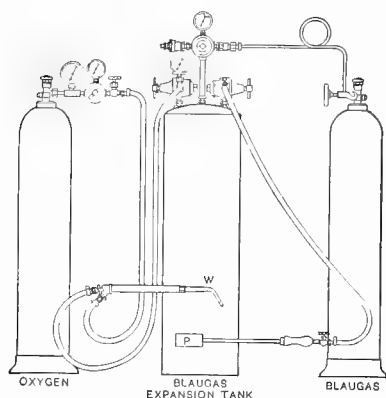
OXY-BLAUGAS WELDING OUTFIT.
